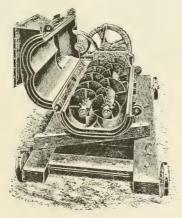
Double-spiral, rapidly rotating peat machine, with discontinuous screw-threads, for fibrous peat.
